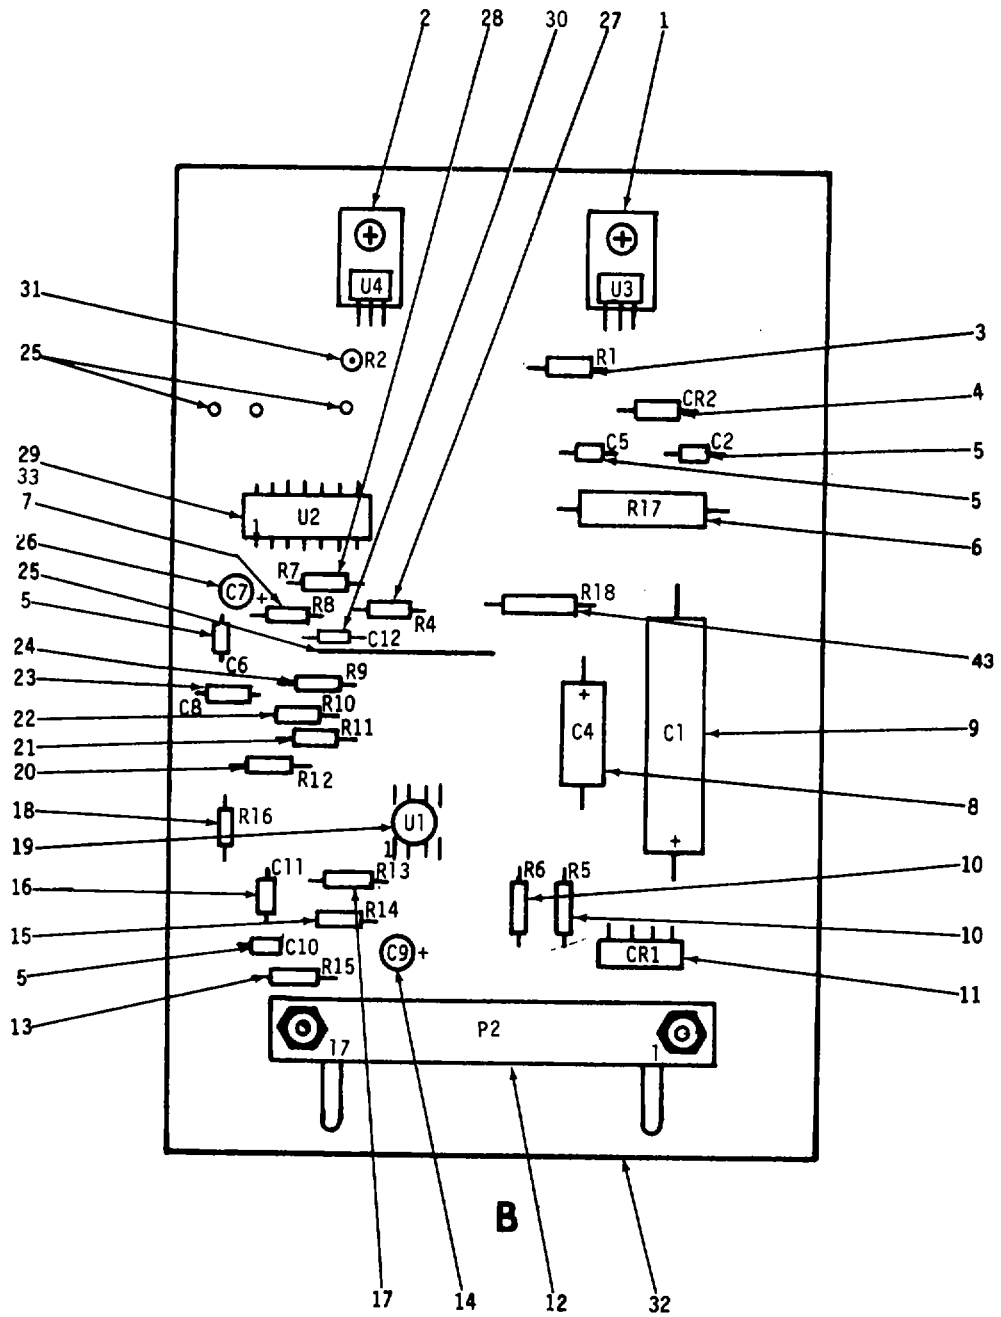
Circuit Board Assembly (Sheet 2 of 2)
